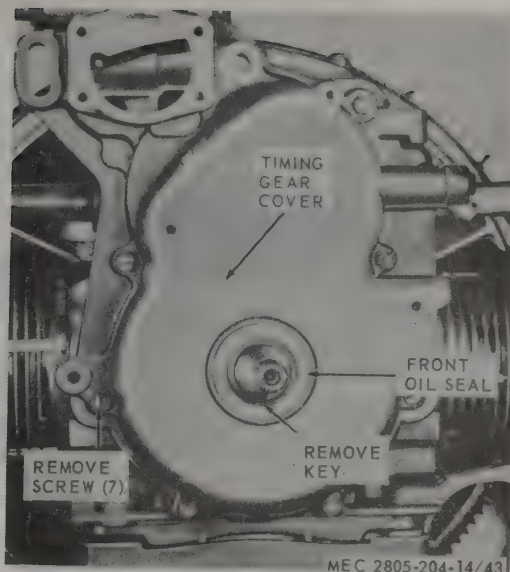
Timing gear cover and front oil seal, removal and installation.
